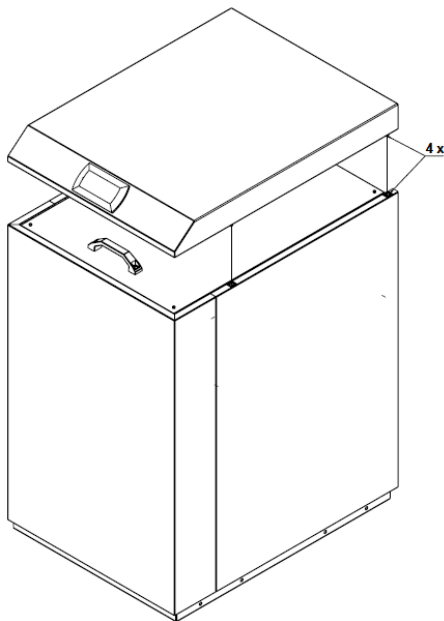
Disassembly process for the top cover of Clausius heat pumps with Classic configuration.
